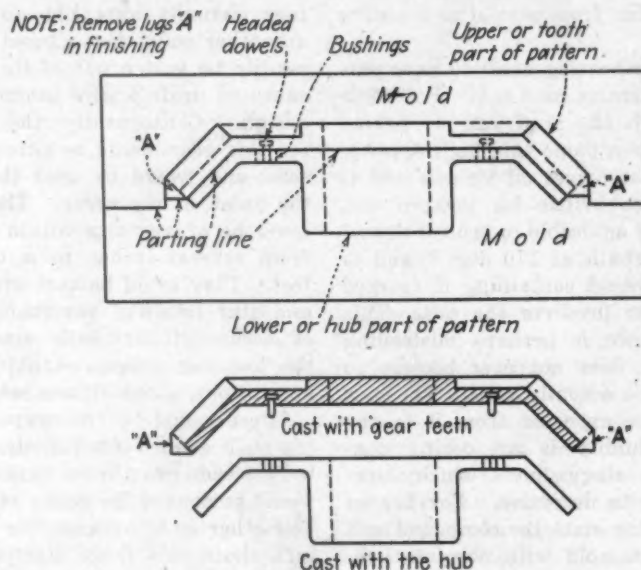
Two halves of a wax pattern for a bevel gear. Each half is turned in a lathe to the parting line shown.
